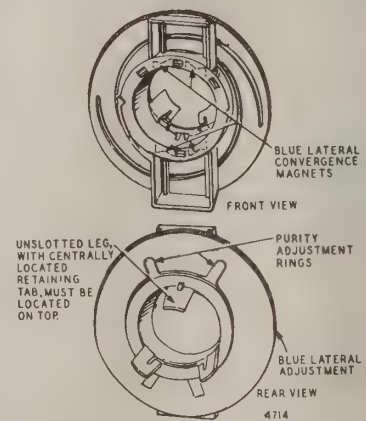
B — Blue Lateral Magnet and Purity Ring Assembly
